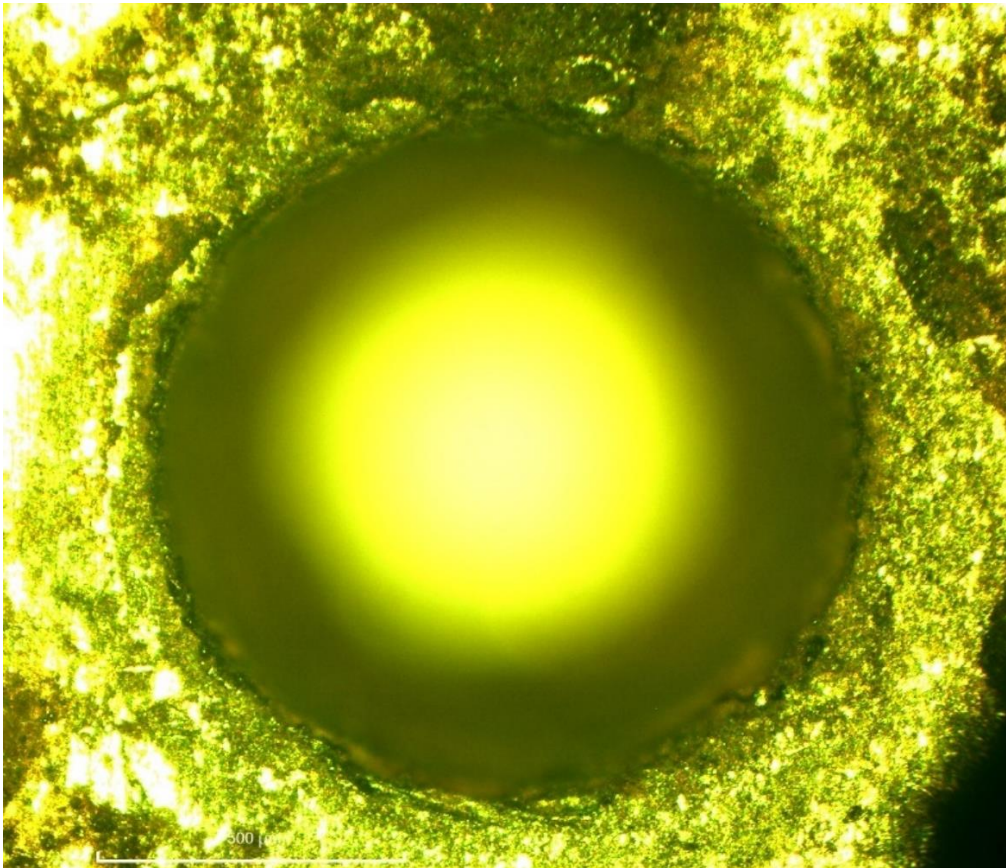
Microscopic photo of a through hole machined by drilling EDM
